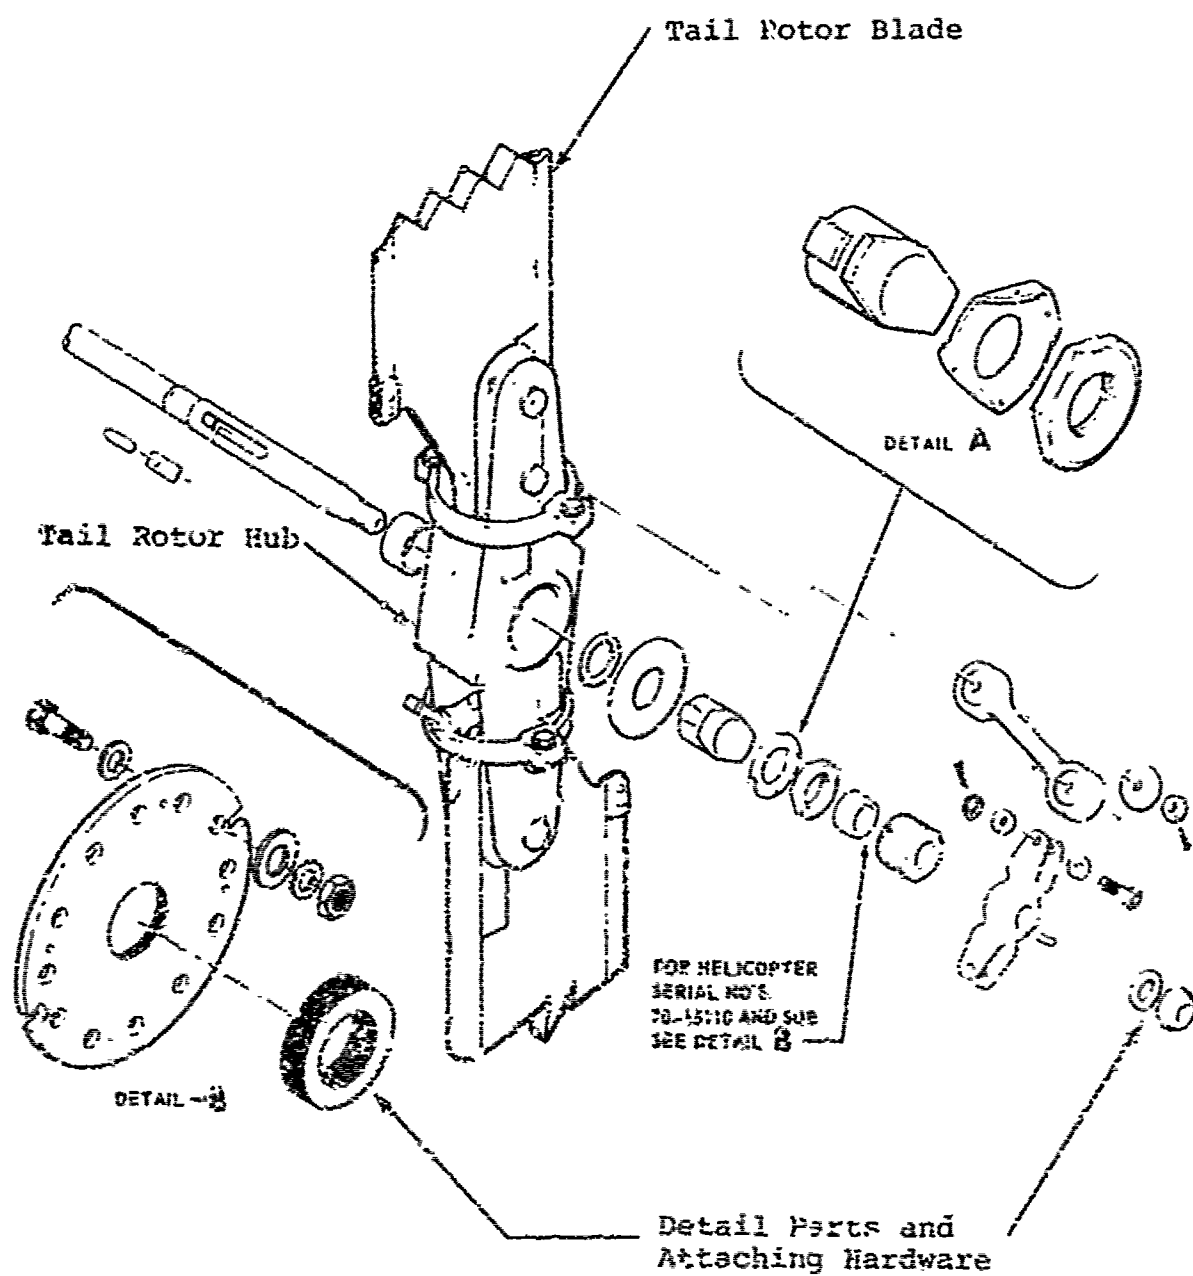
Tail Rotor Assembly, OH-58 Helicopter.
